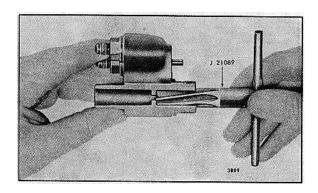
Cleaning Injector Body Ring using Tool J 21089
